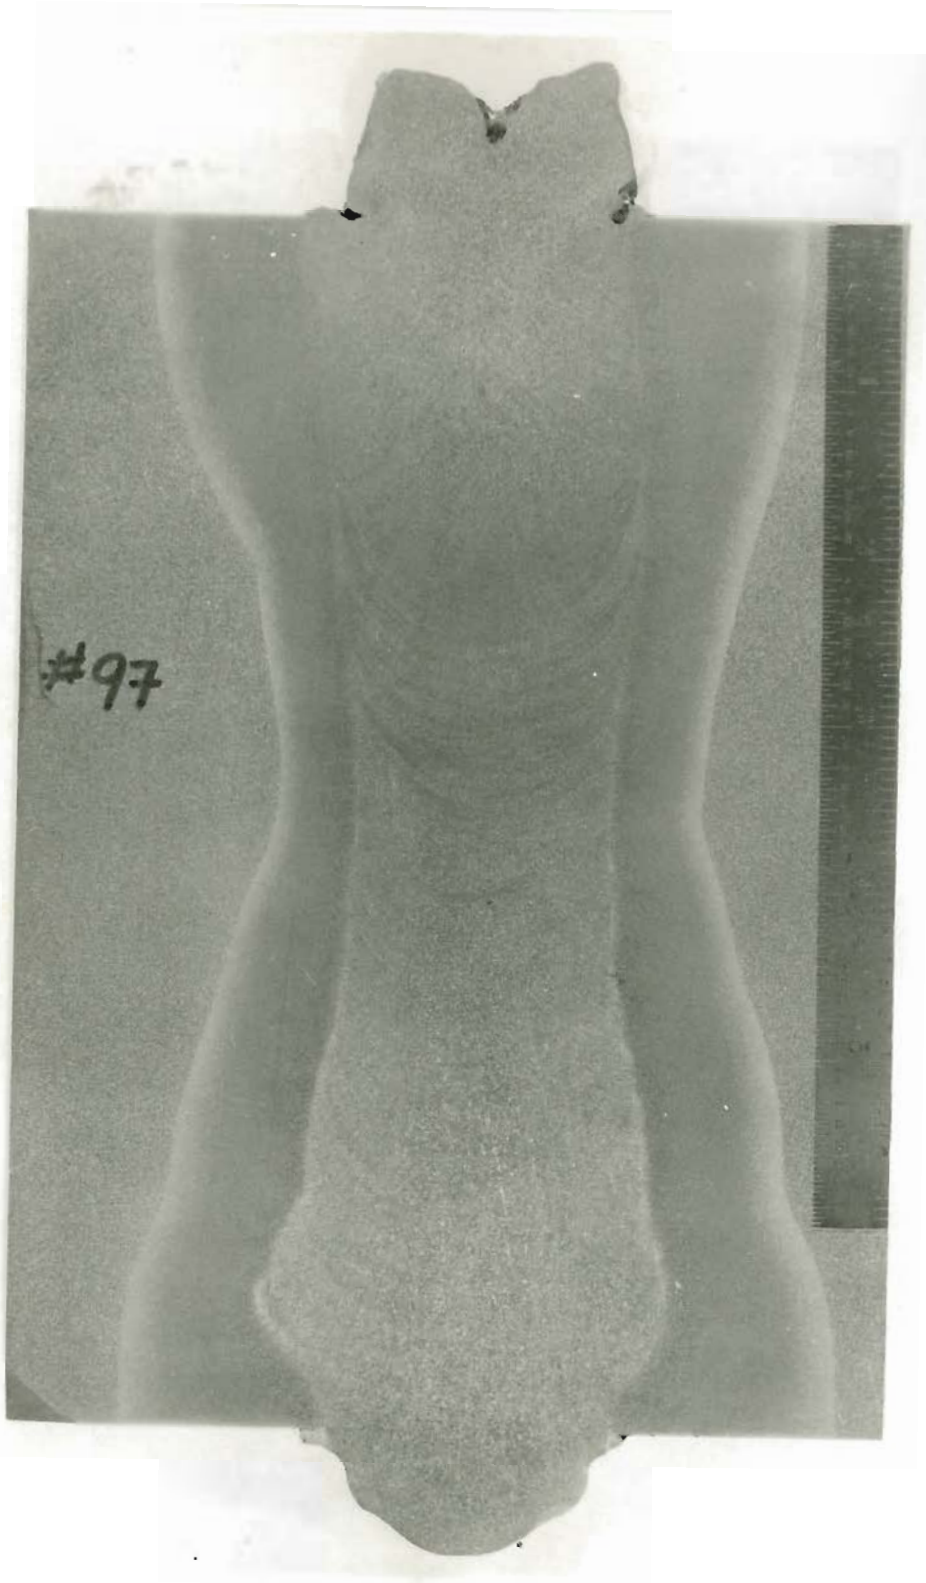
LONGITUDINAL VERTICAL MACROSECTIONS OF RAIL WELDS.
